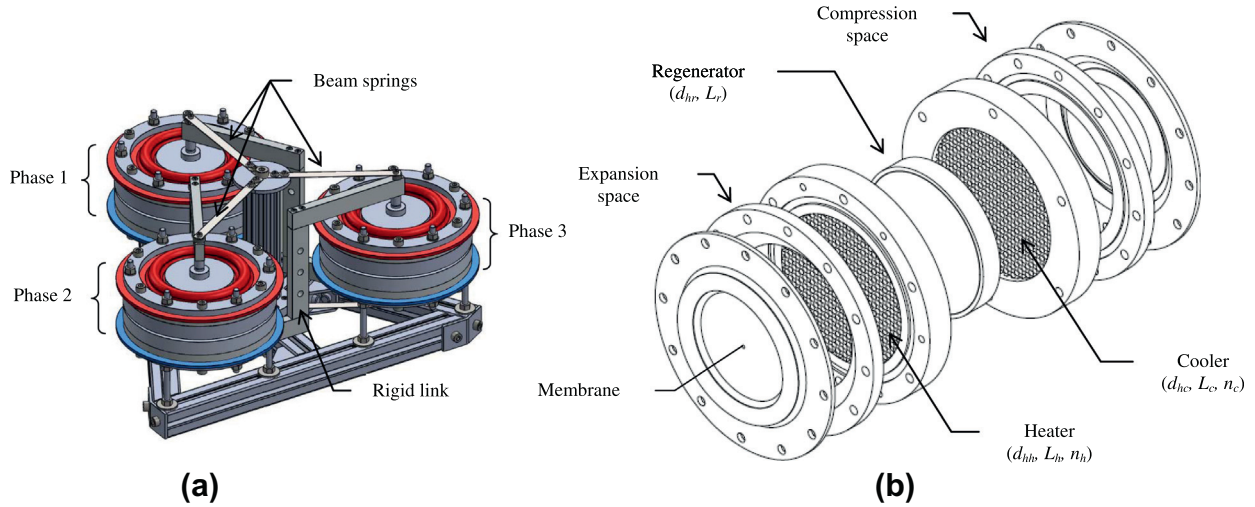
(a) Schematic of the proposed double acting free-piston engine and (b) exploded view of a single phase.
